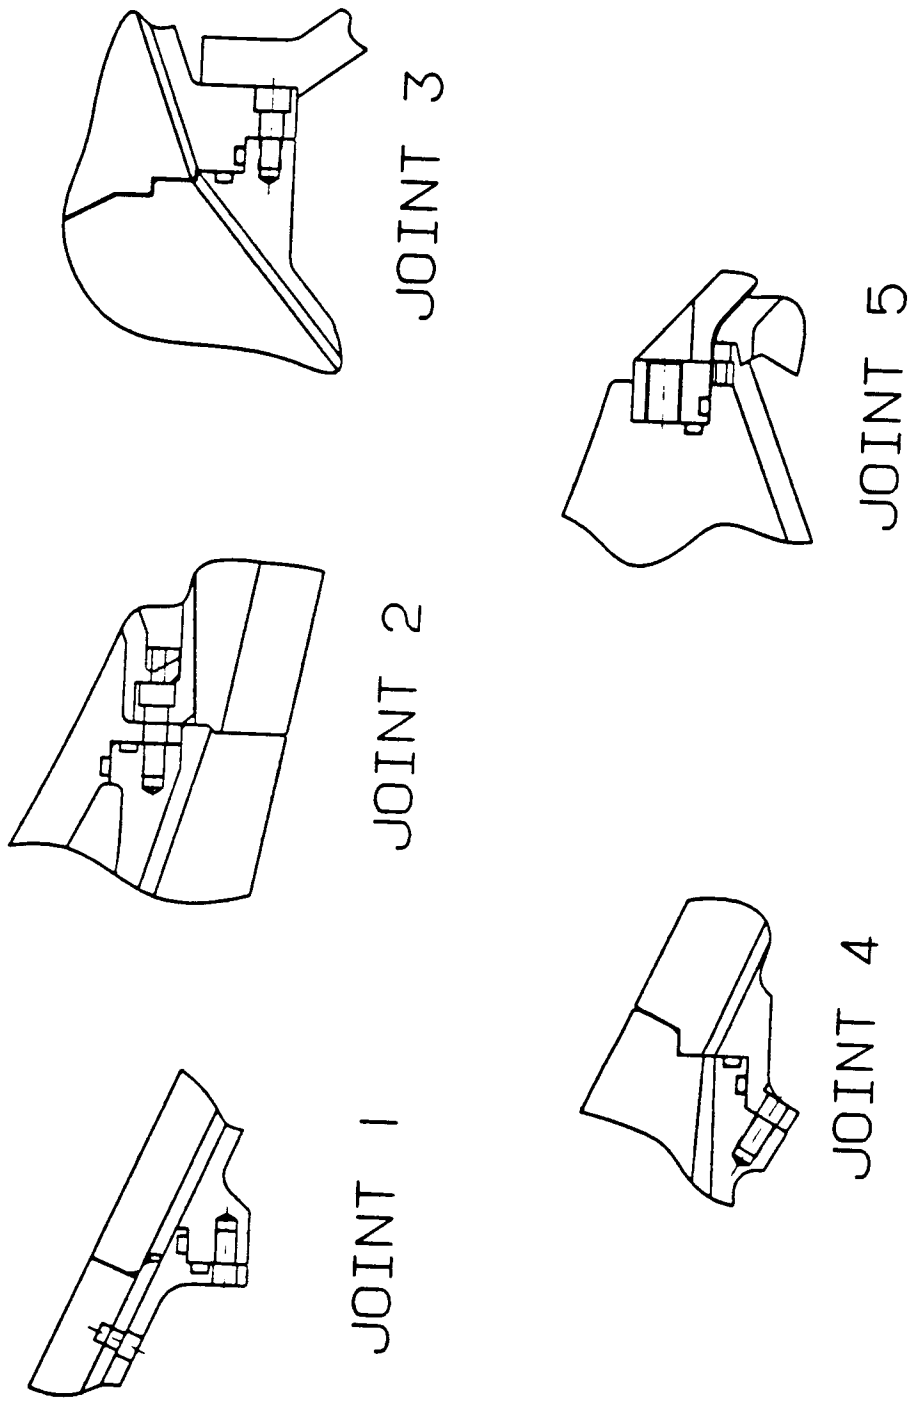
BLOCK II NOZZLE SUBASSEMBLY JOINT DESIGNS.
